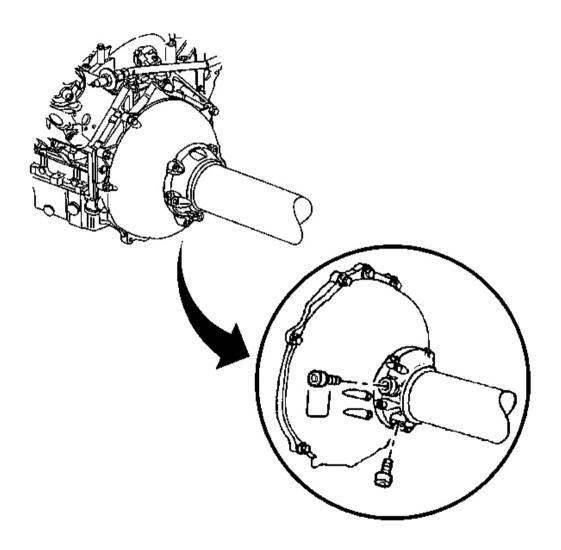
Two Plug Bolts & Front Of Driveline Support Assembly Courtesy of GENERAL MOTORS CORP.
